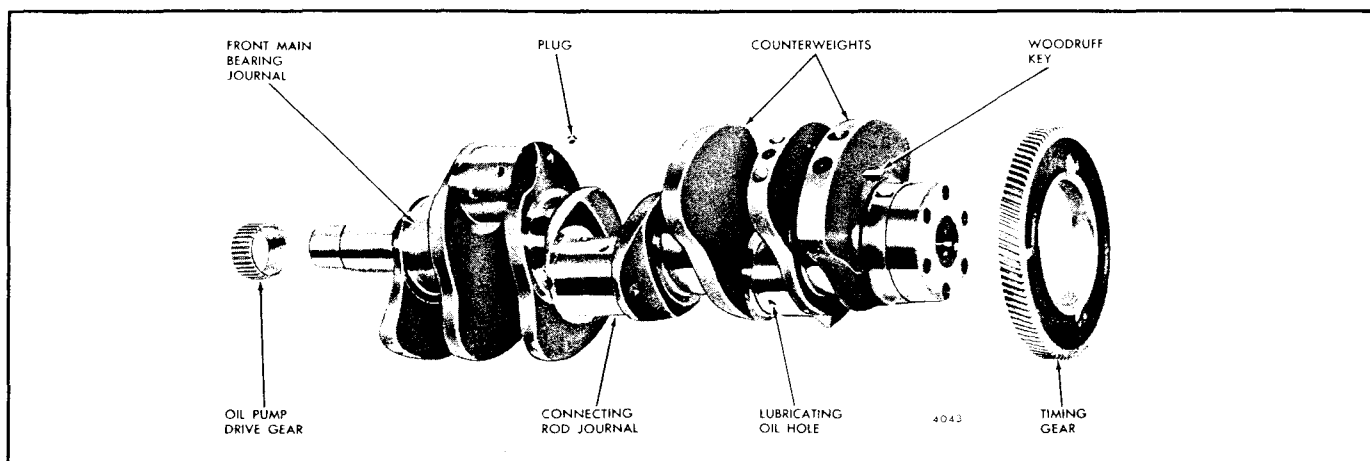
Crankshaft Details and Relative Location of Parts (6V-53 Engine Crankshaft Shown)
